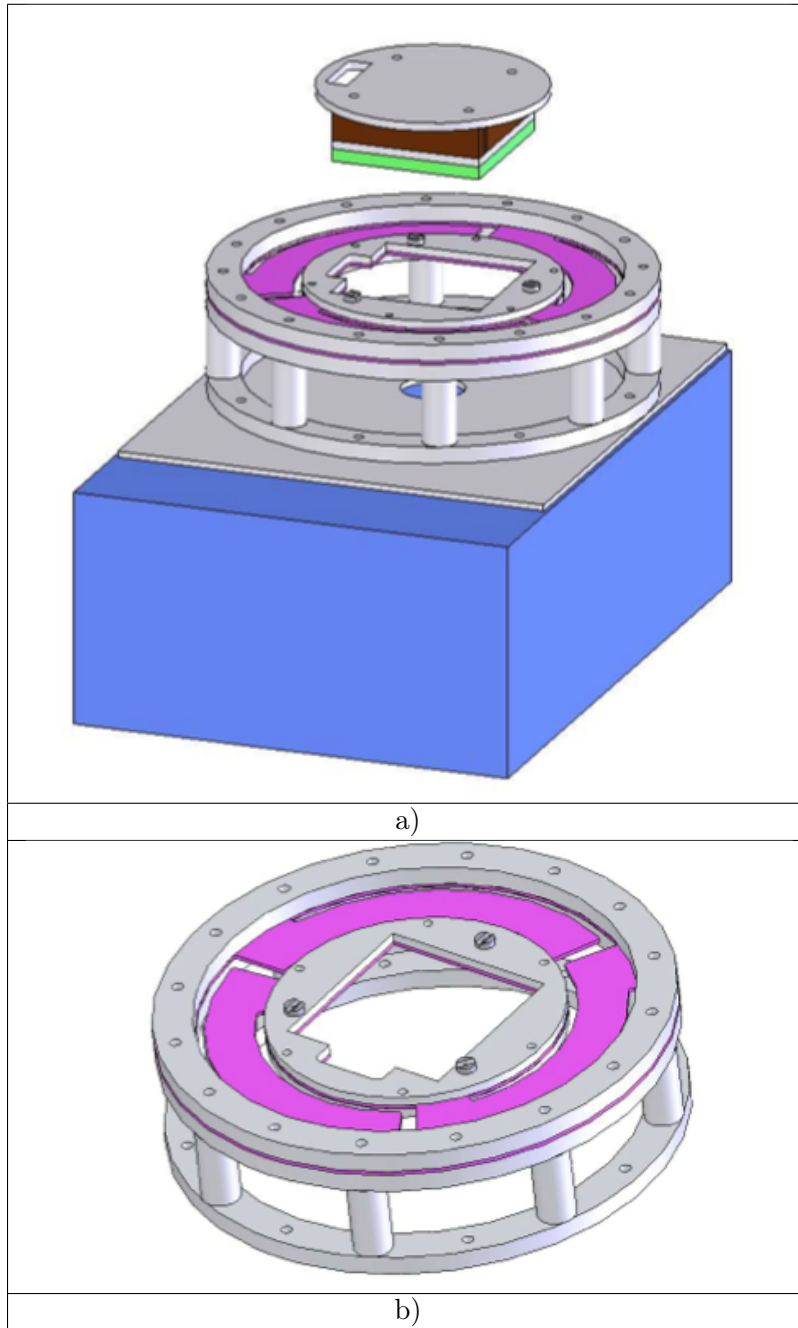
Spincoater with integrated flexure design. a) spincoater base with flexure assembly grounded to equipment. b) flexure assembly, with flexure attached to spacers to hold flexure at specific distance above spincoater chuck.
